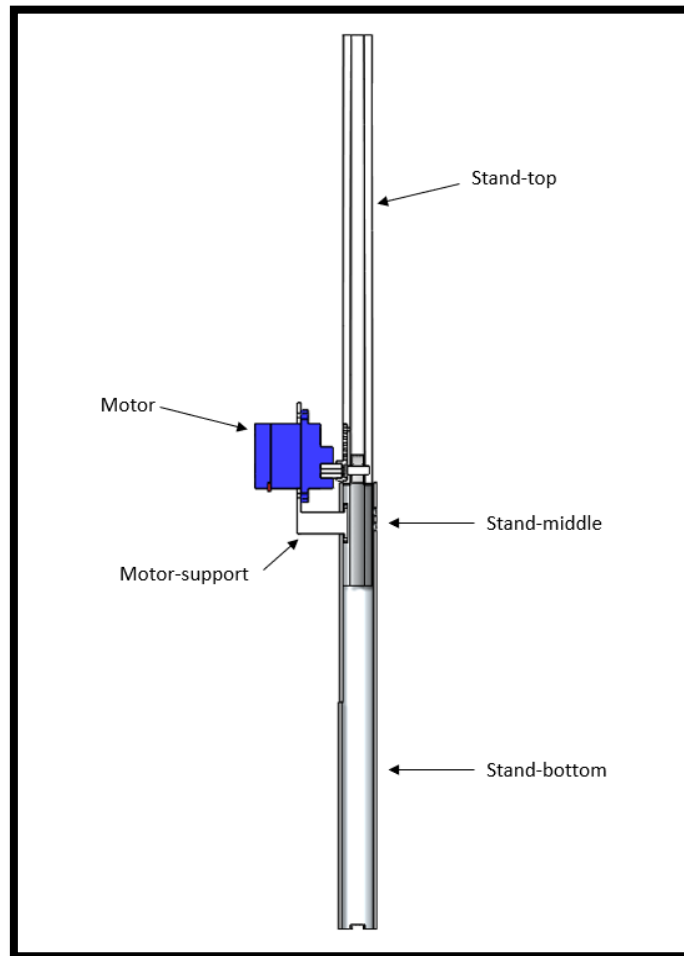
Cross-sectional View of Stand Sub-Assembly.
